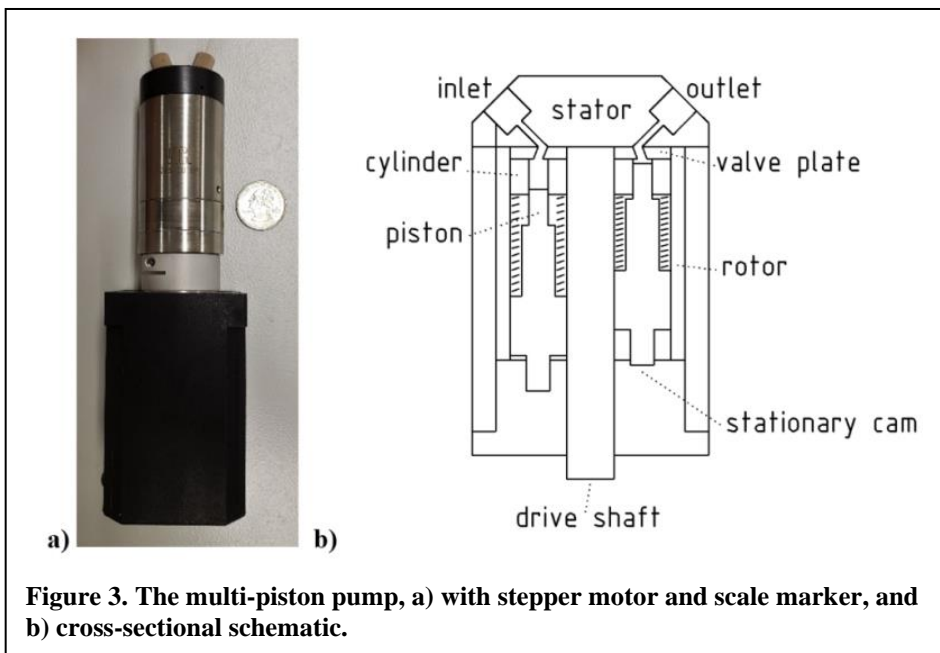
The multi-piston pump, a) with stepper motor and scale marker, and b) cross-sectional schematic.
